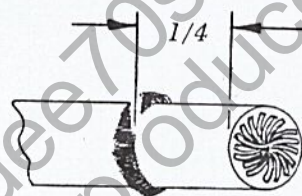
8 Installing High-Tension Lead In Coil After Parts Replacement
